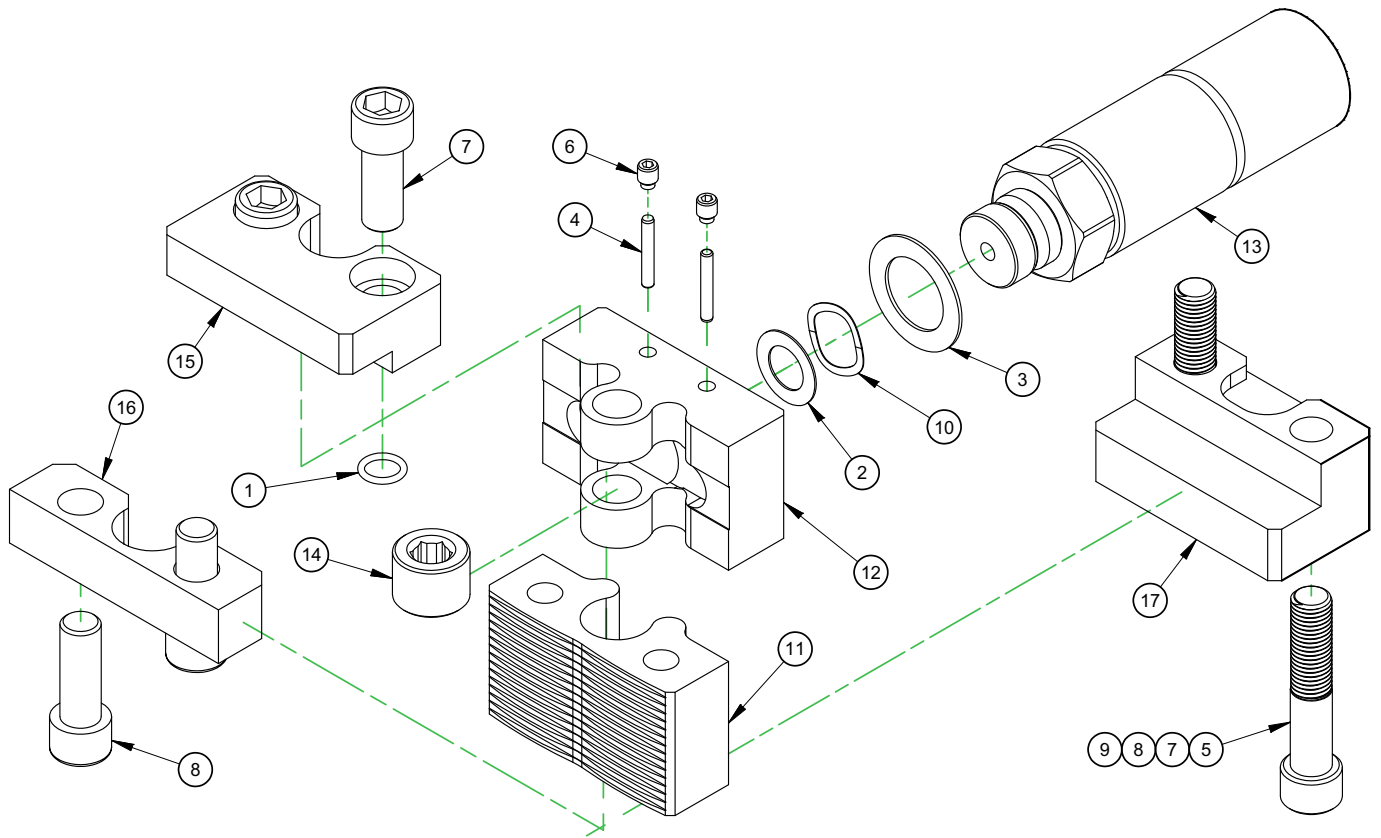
LOAD TESTED LIFTING ASSEMBLY (P/N 68425)
